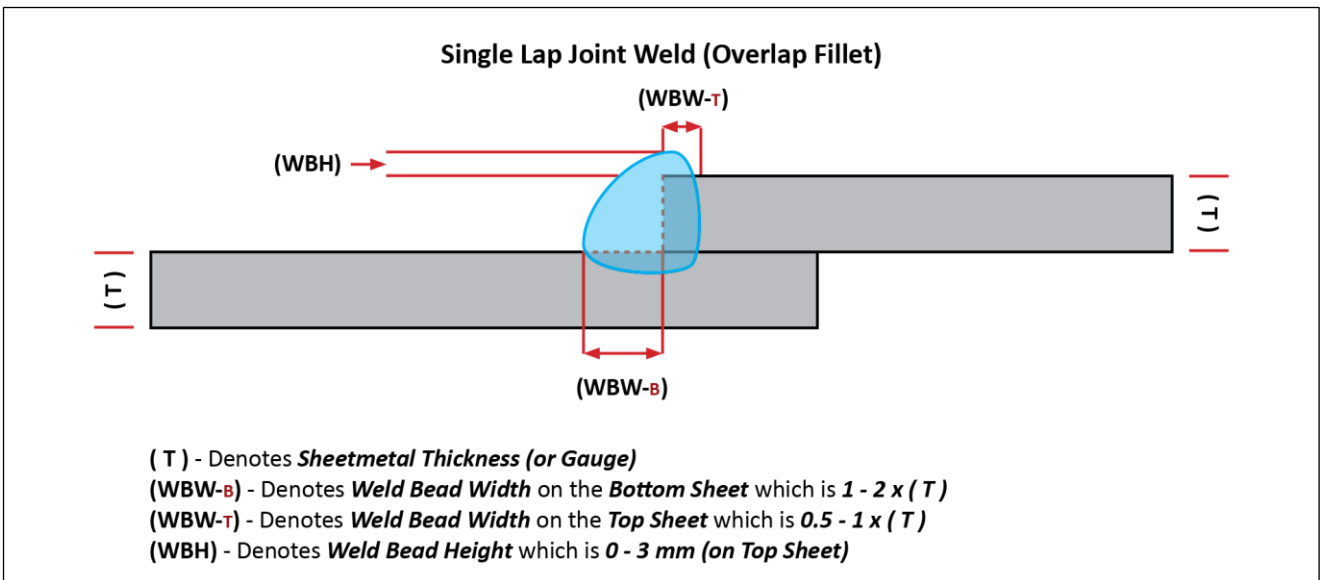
Single-lap joint weld (overlap-fillet).
